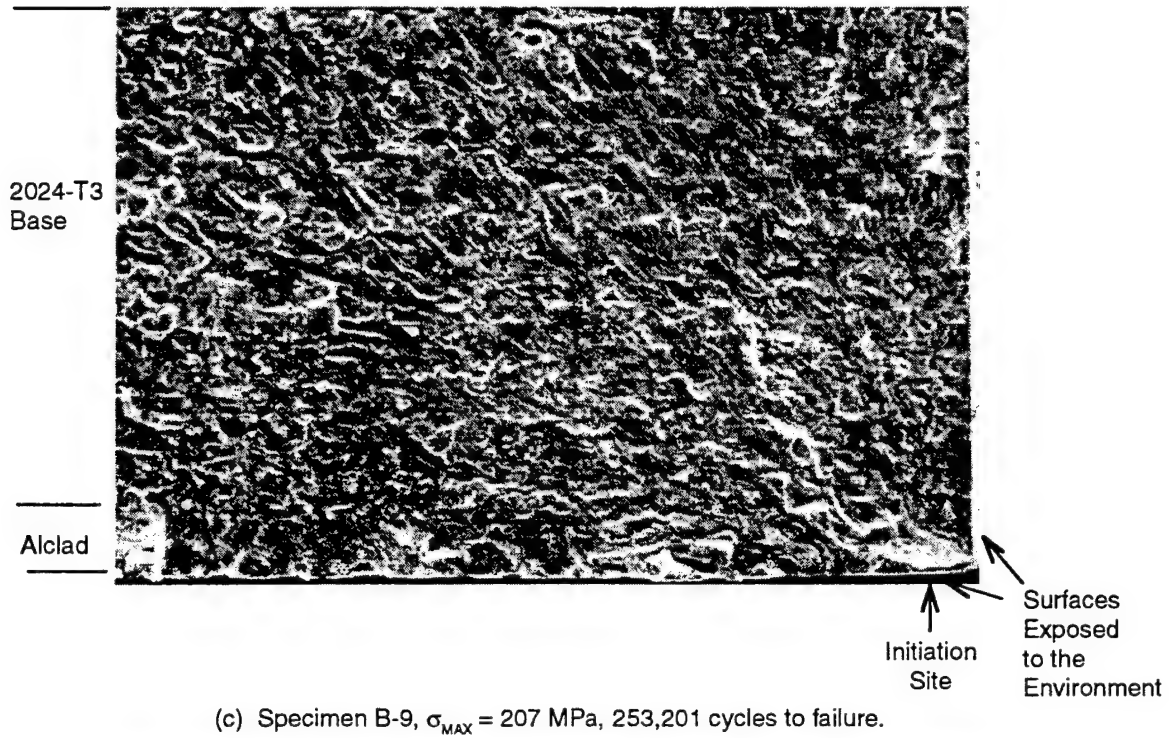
FRACTURE SURFACE APPEARANCE OF ALCLAD 2024-T3 FATIGUE SPECIMENS TESTED IN AIR. (CONCLUDED)
